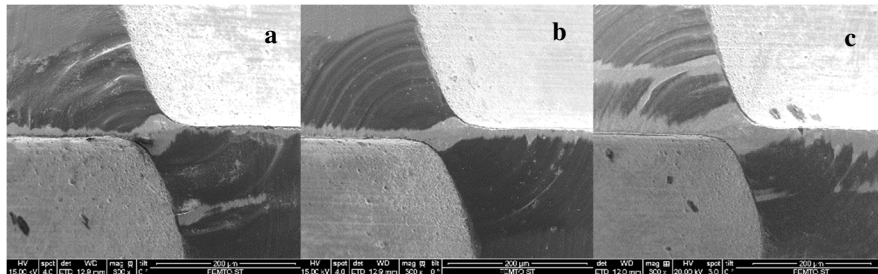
Overview of the tool tip after 4,960 (a), 11,360 (b) and 17,760 mm (c) of machining
